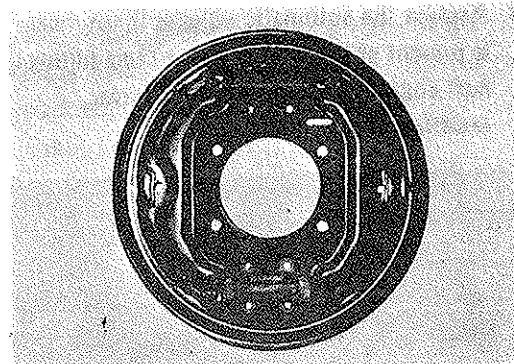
Installing Wheel Cylinder and Anchor or Block
